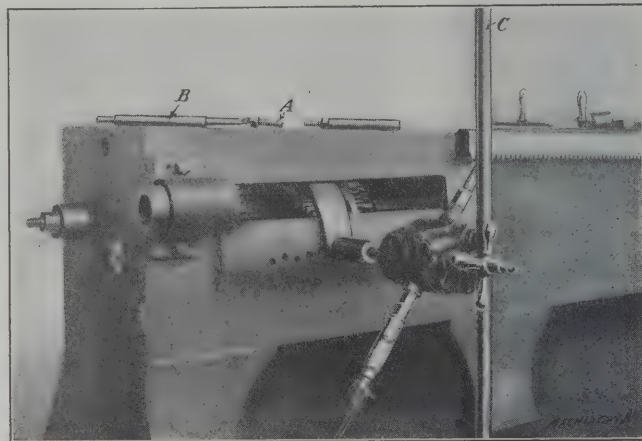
Method of Drilling and Reaming the Holes in the Lathe Bed for the Tumbler Locking Pins
